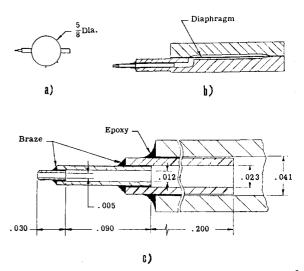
Miniature Pitot tube arrangement. a) Pitot-tubetransducer assembly, b) section through transducer showing tube installed, c) section showing Pitot tube in transducer entrance (all dimensions in inches).
